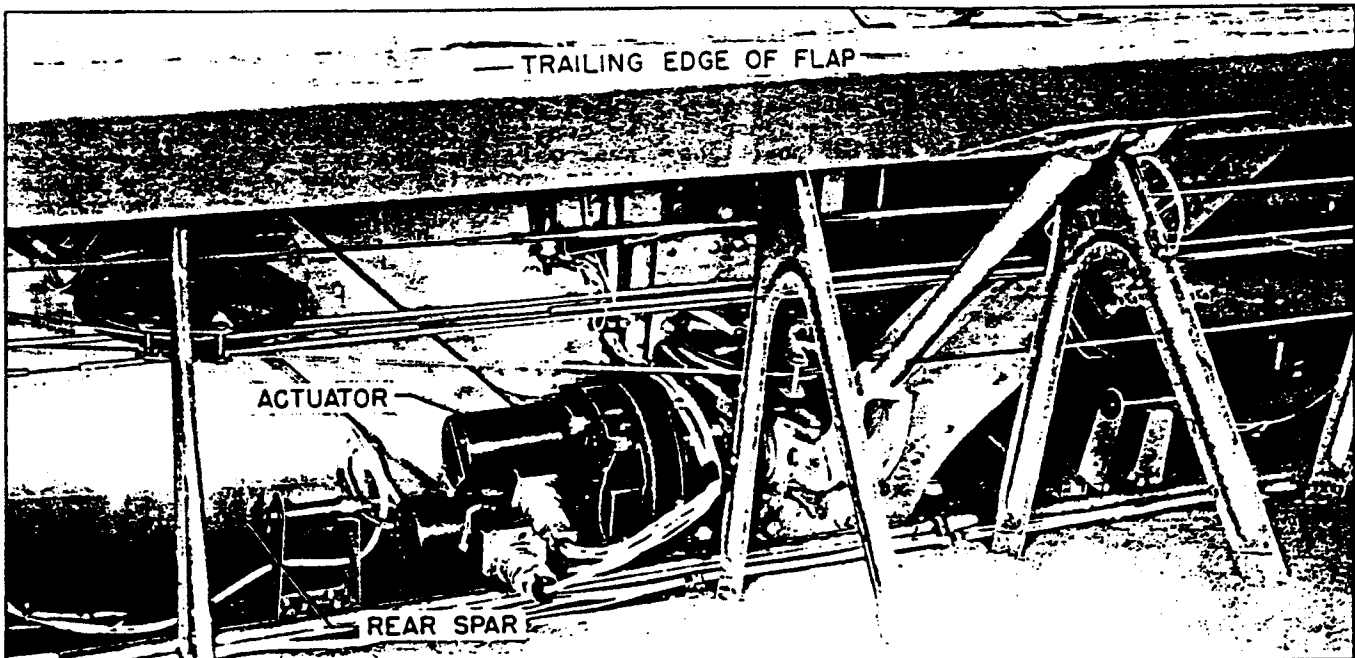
Intercooler Flap Actuator Mechanism (Typical)
